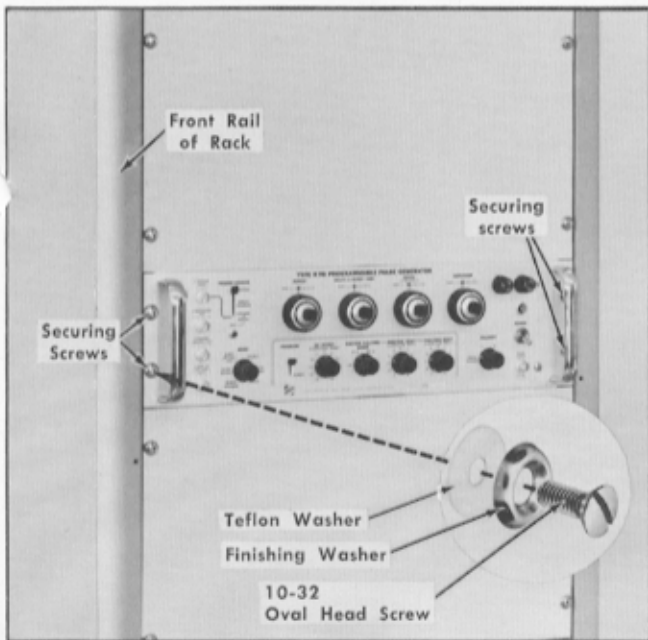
The Type R116 is secured into the rack with 4 screws and washers, assembled as indicated in the inset photo. Remove these screws to extend the Type R116 in its slide-out track. (Refer to the foldout Rackmounting instructions at the rear of this manual for installing the slide-out tracks.)
